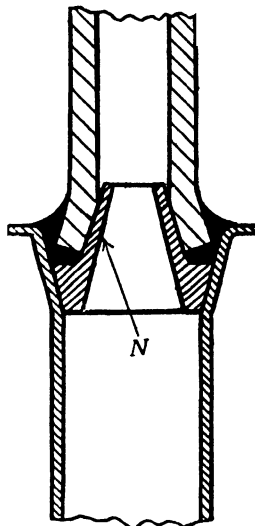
An easily made and opened annular joint between a thick lead tube and a brass or copper one. The lead tube is not likely to become choked by solder, and the brass nipple may be removed easily when necessary.
